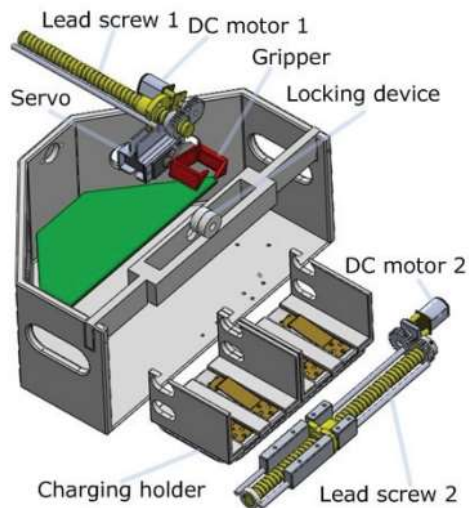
The Mechanical Structure of Linear Motion C-Shaped Gripper (Wuet al., 2012).
